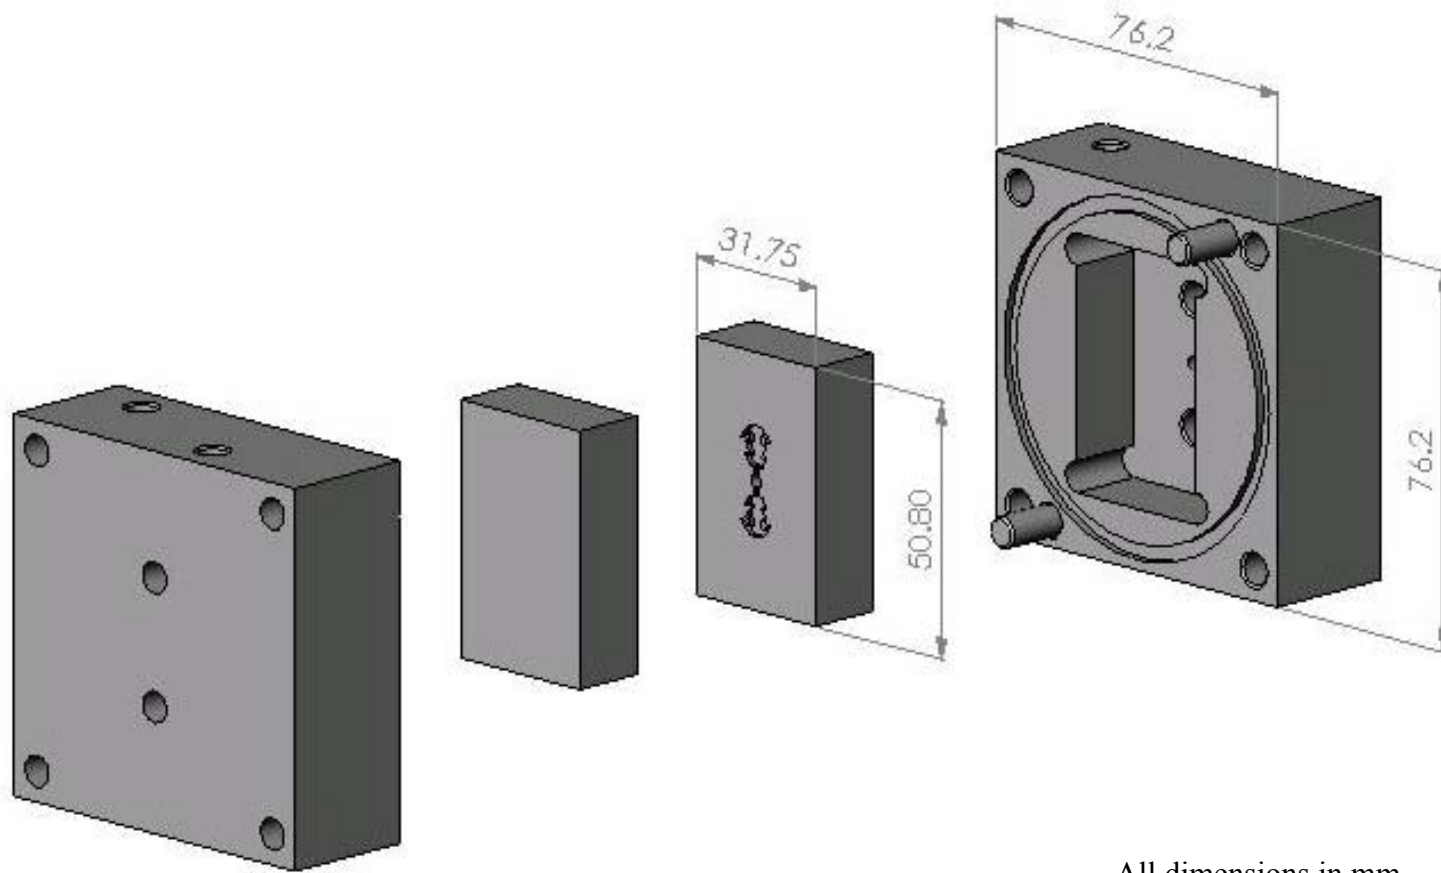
Mold tool with mold inserts for micromolding prototype
